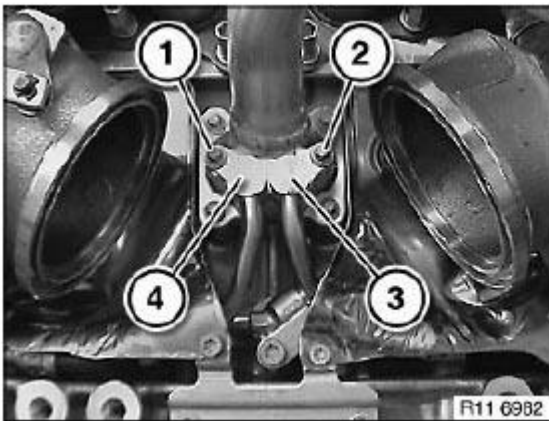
Identifying Coolant Feed Line With Mounting Screws
